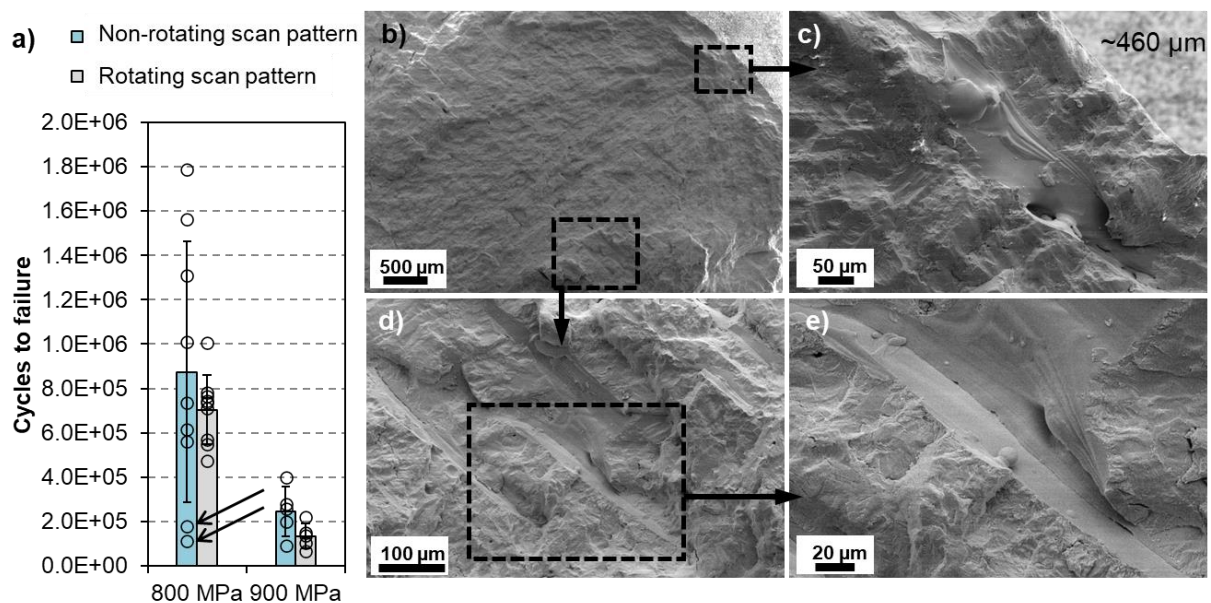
Fatigue life of specimens manufactured with non-rotating laser scan pattern compared to specimens manufactured in identical conditions but with rotating scan pattern (a). The fracture surface of one of the outliers indicated (b-e). Adapted from Paper XI.
